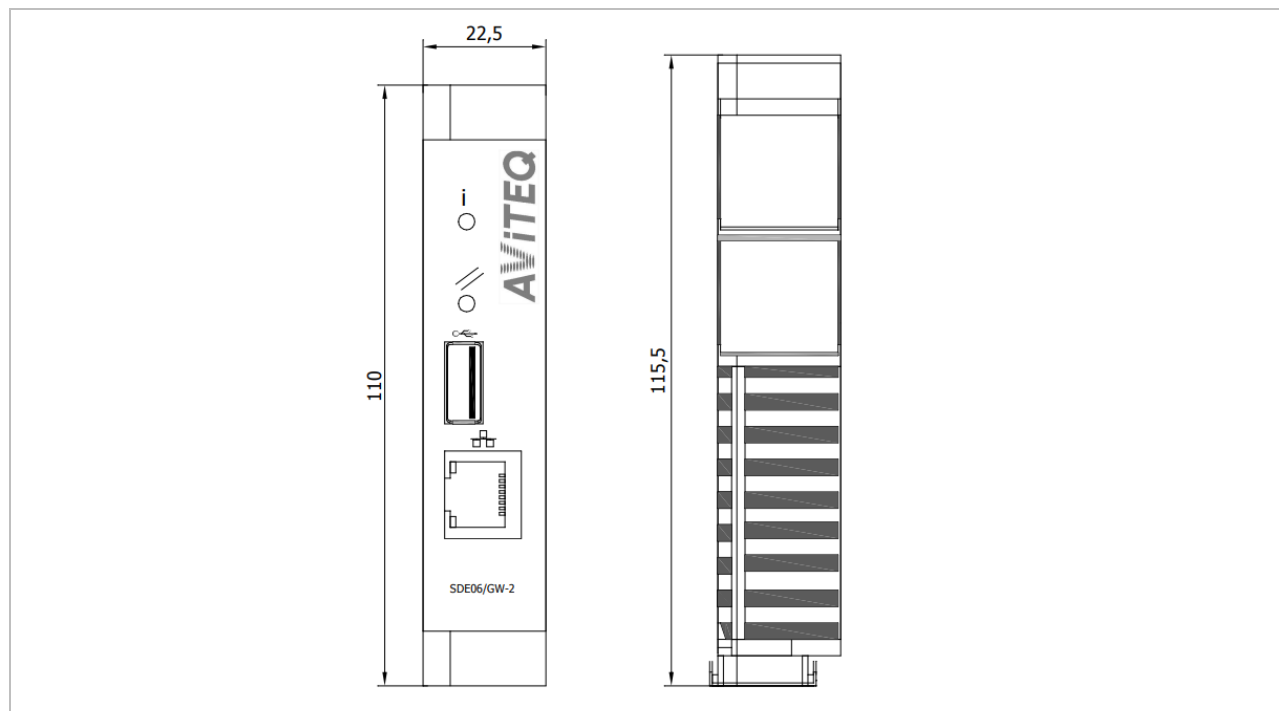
Dimensions SDE06/GW-2 – left front view - right bottom view
